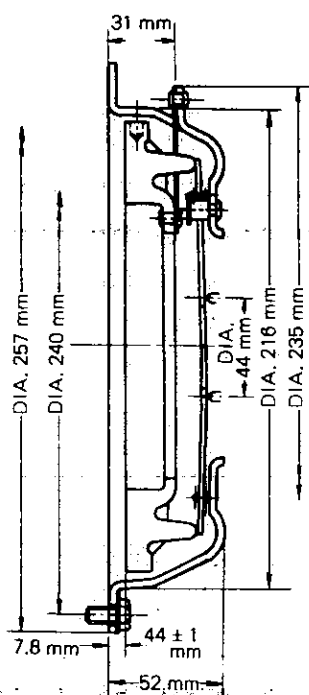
Clutch Cover Assembly (Diaphragm Spring-Type)
